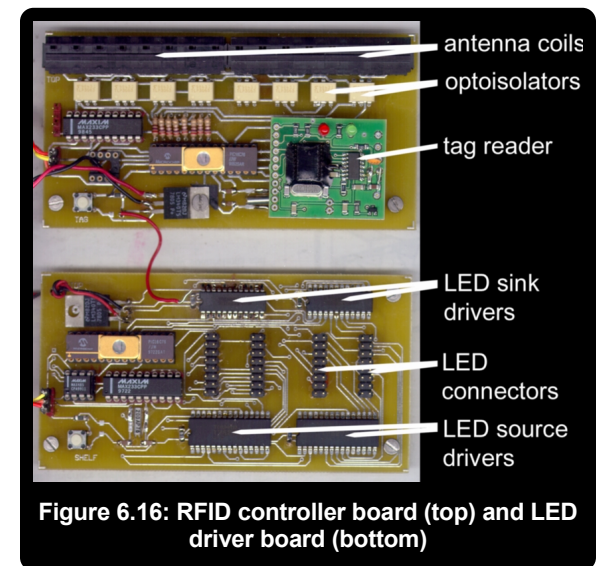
RFID controller board (top) and LED driver board (bottom)
